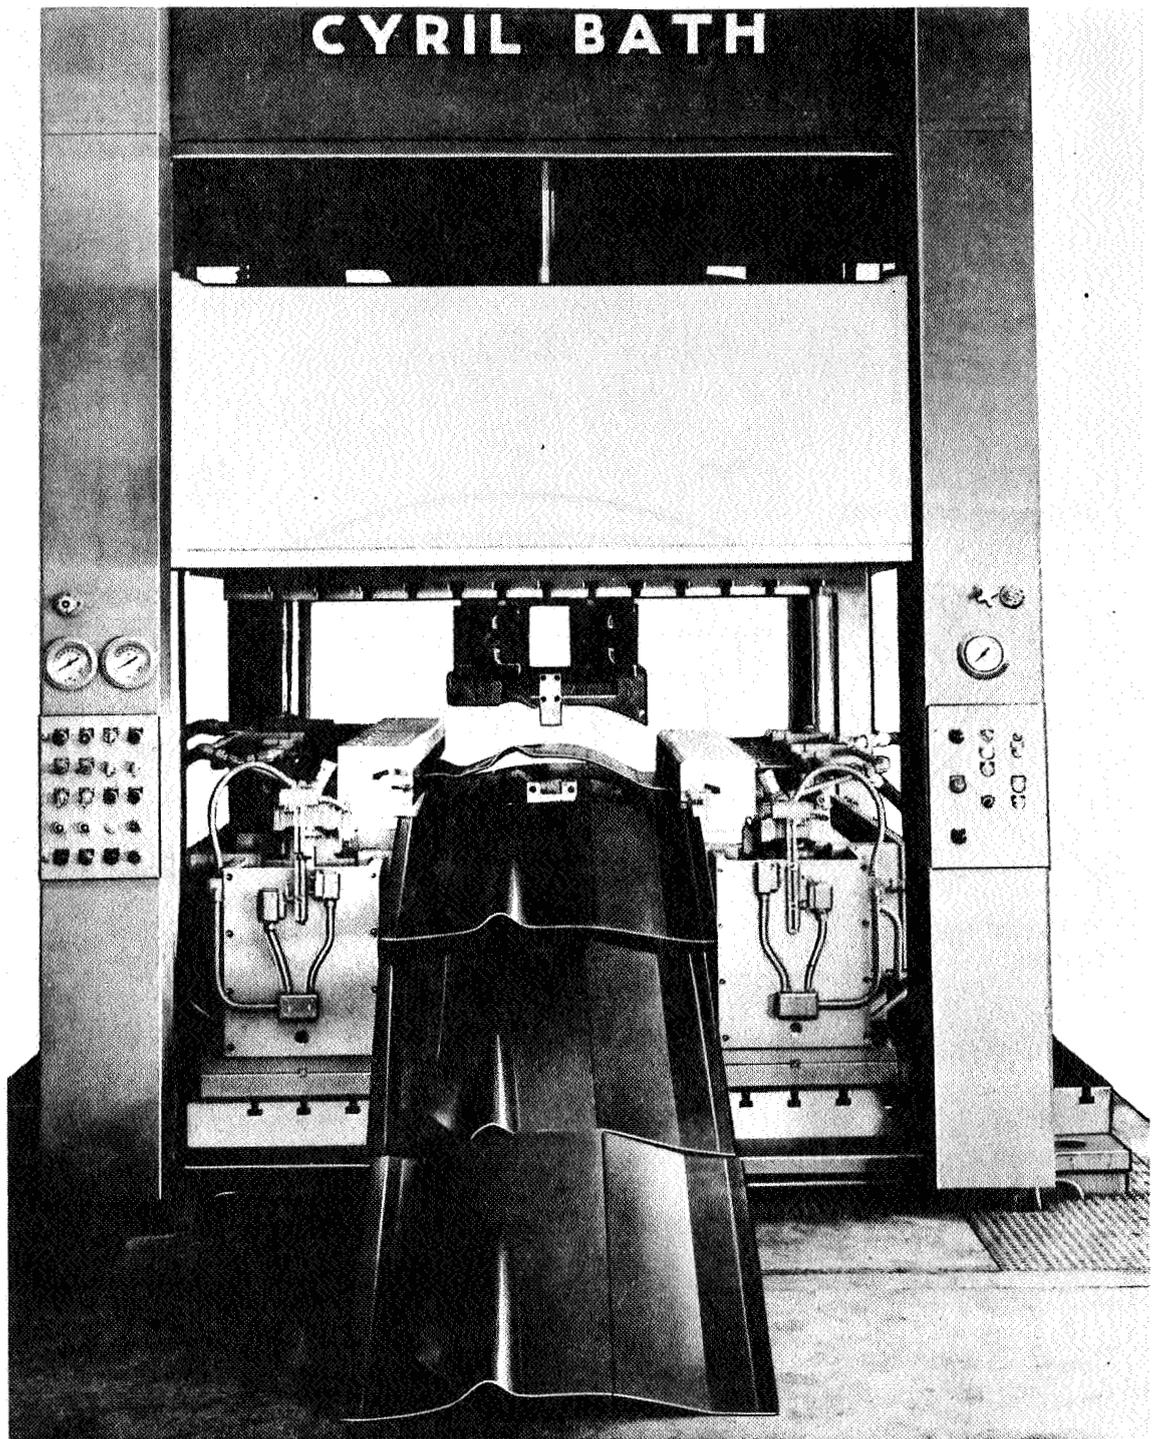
STRETCH-DRAW-PROCESS MACHINE FOR SHEET
